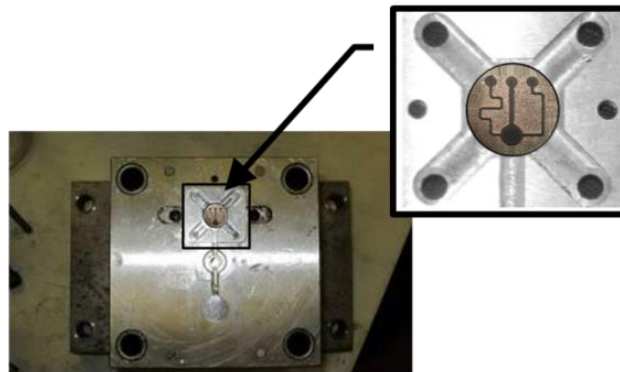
BMG insert and secondary insert holder assembly fitted into the primary mould
